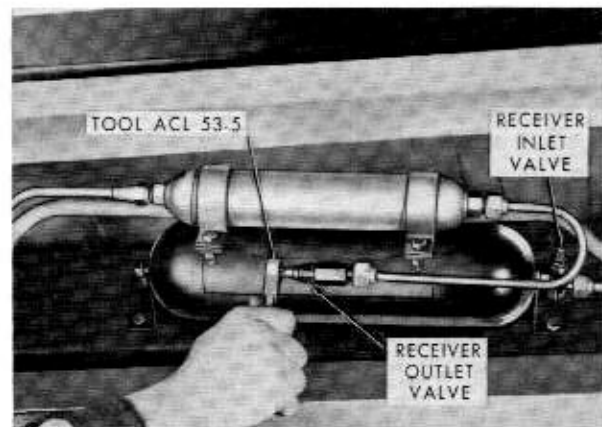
A-4—Closing Receiver Outlet Valve—(4L-715)
